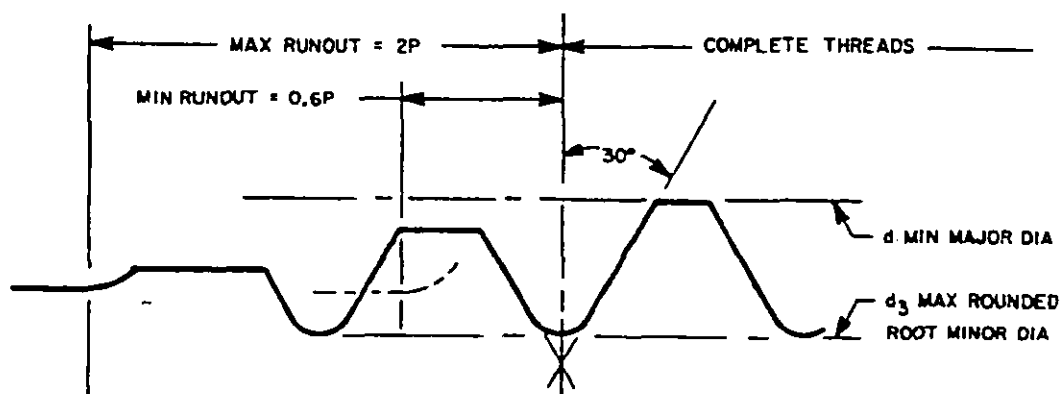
INCOMPLETE FORMED THREADS, PITCH DIAMETER SHANK FASTENER
